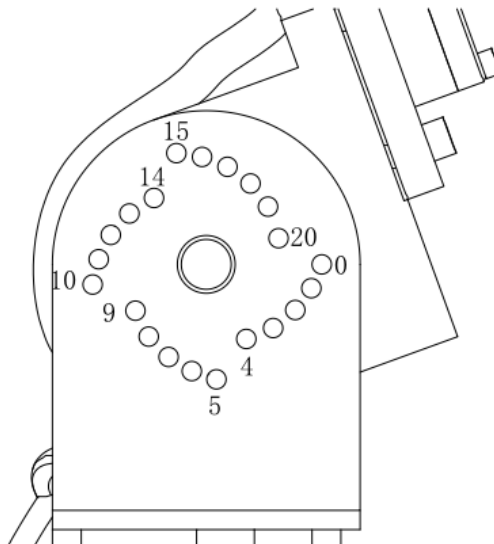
Installation of Elevated Runway Guard Light scale ring 1
